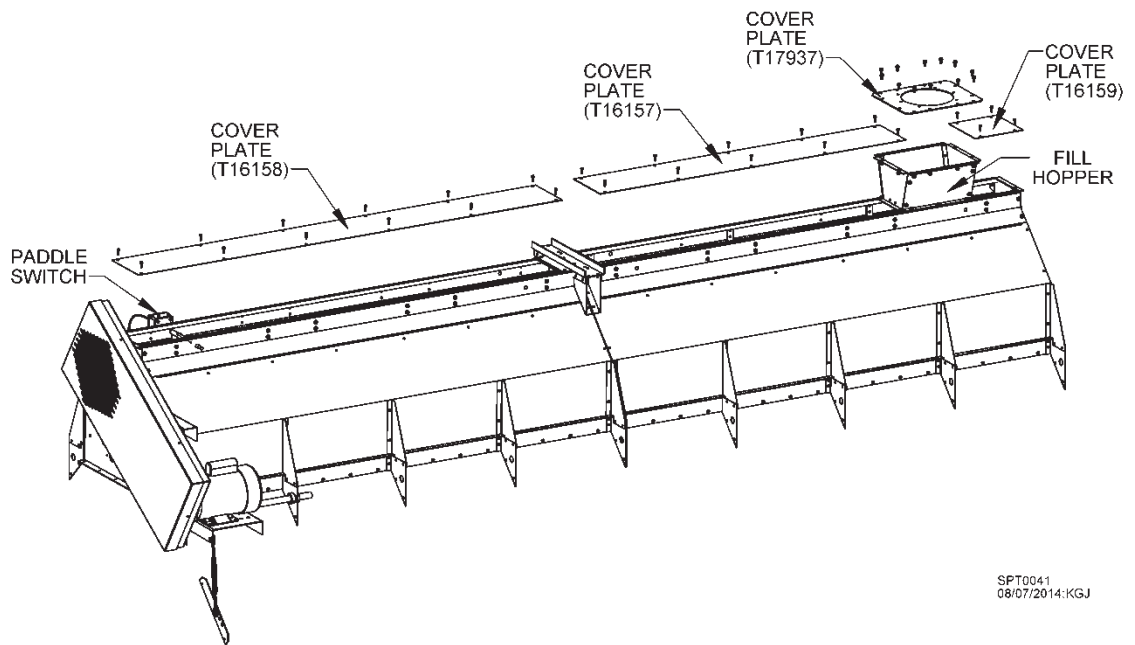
Fill hopper installation at rear of wet bin (16' dryer shown)
